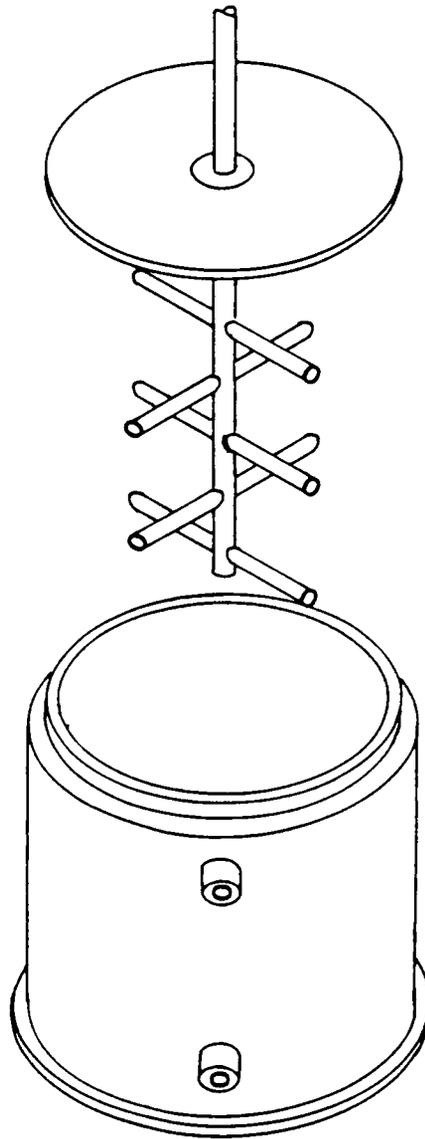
Three dimensional schematic of batch stirred ball mill.
